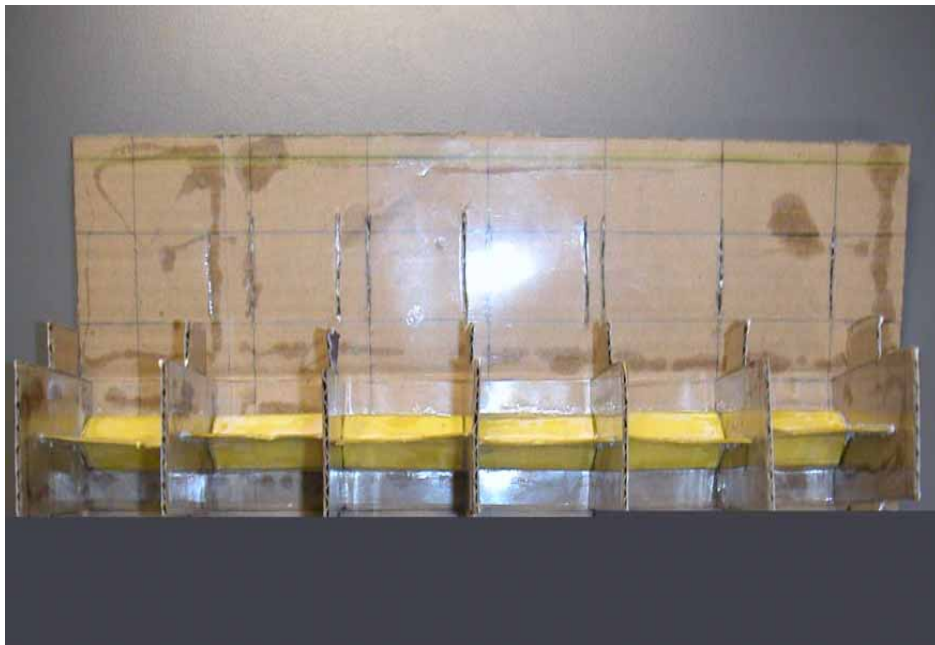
Top view of mould with canola oil and pasted with project sheet.
